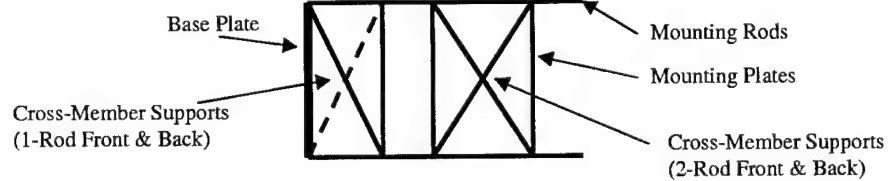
Truss Configurations (Momentum Wheel Side)
